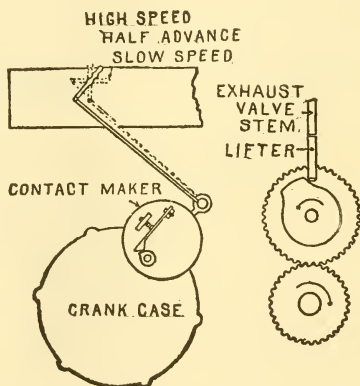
Timing motor cycle valves. After removing contact maker and gear case covers and the large gear, 1, the crank is placed on the upper dead center, and 2, the large gear and cam replaced, the large gear meshing with its driver in such a way that the cam is just breaking away from the lifter as shown in the figure. The gear case cover and contact maker are now replaced. The proper timing of the valve causes it to close on the dead center.
